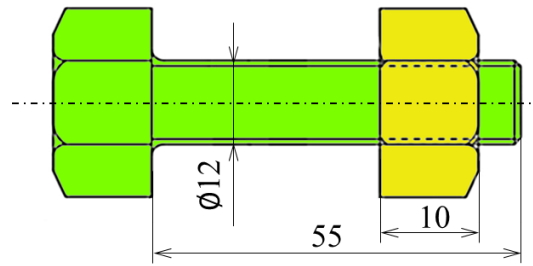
Size of the bolt nut connection used for Junker loosening test (unit: mm).
